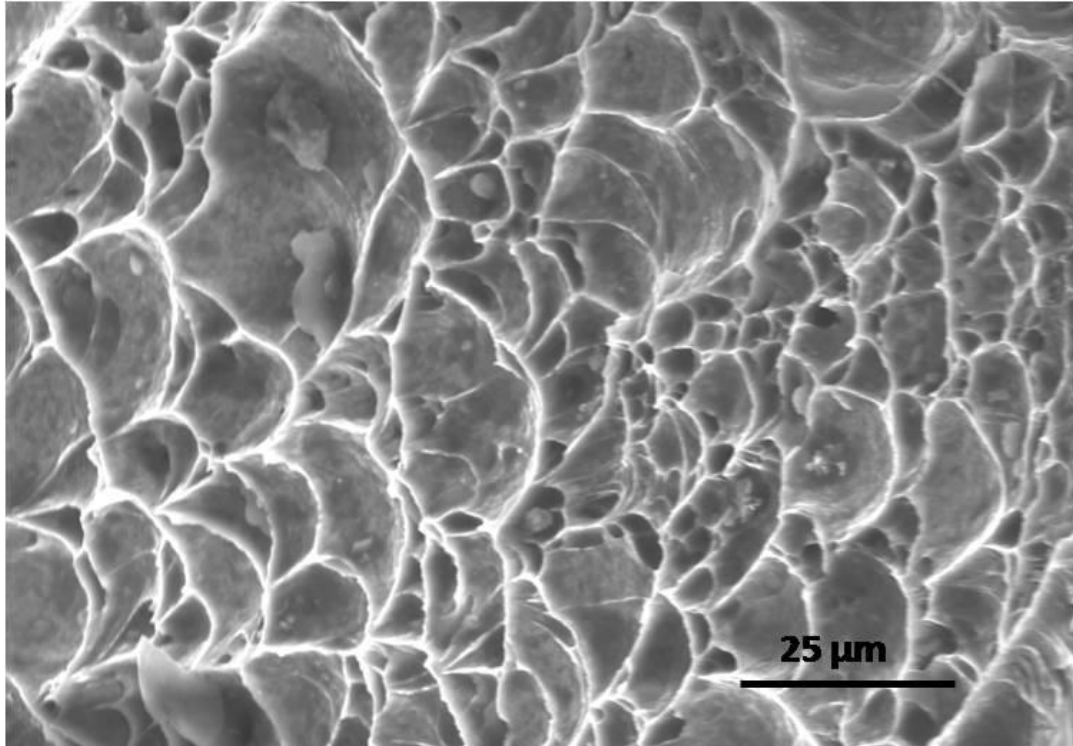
Tensile fracture surface of specimen with a focus of 30
